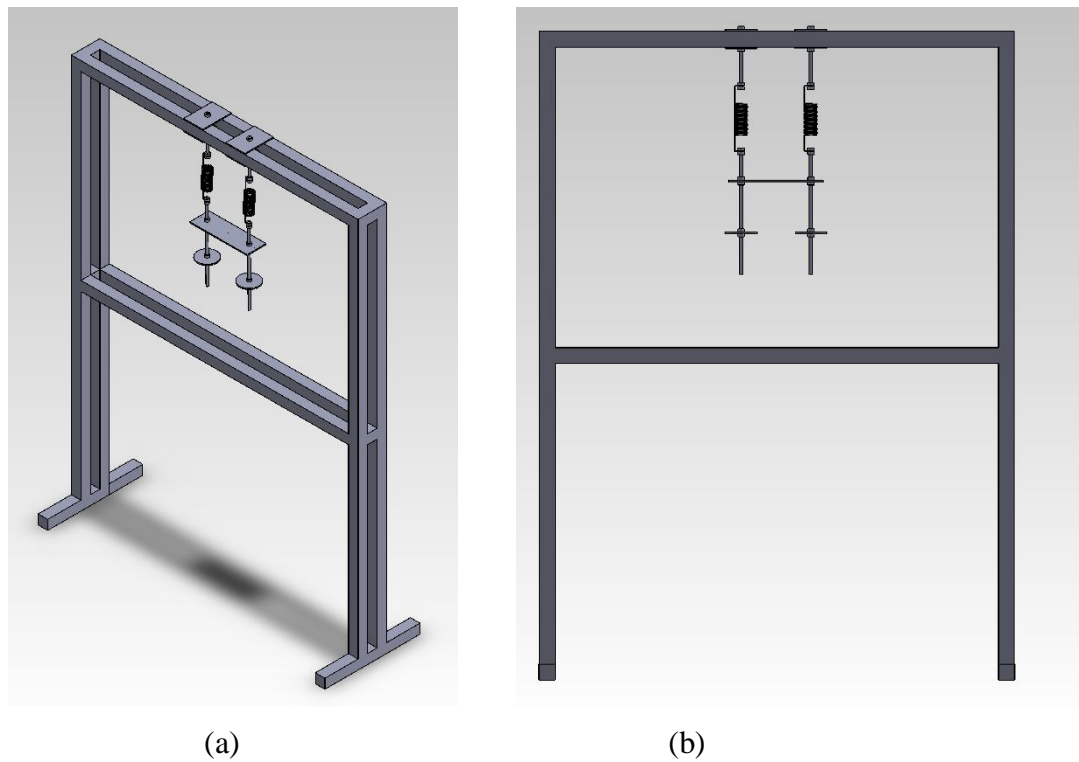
Design Concept 1 (a) isometric view, (b) front view
